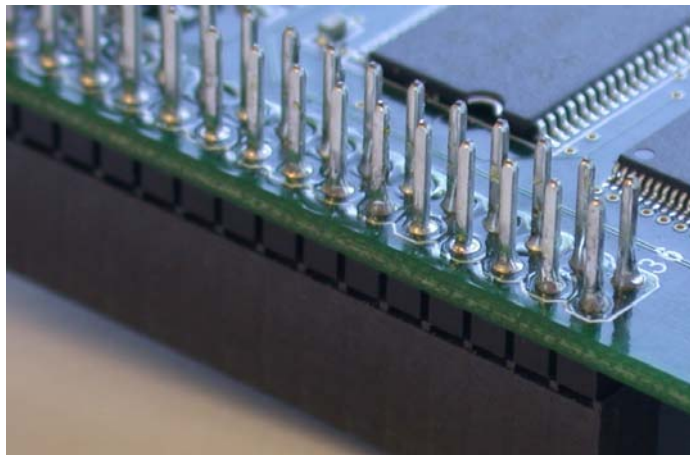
Example solder of a header pin to via on NGW100 PCB
